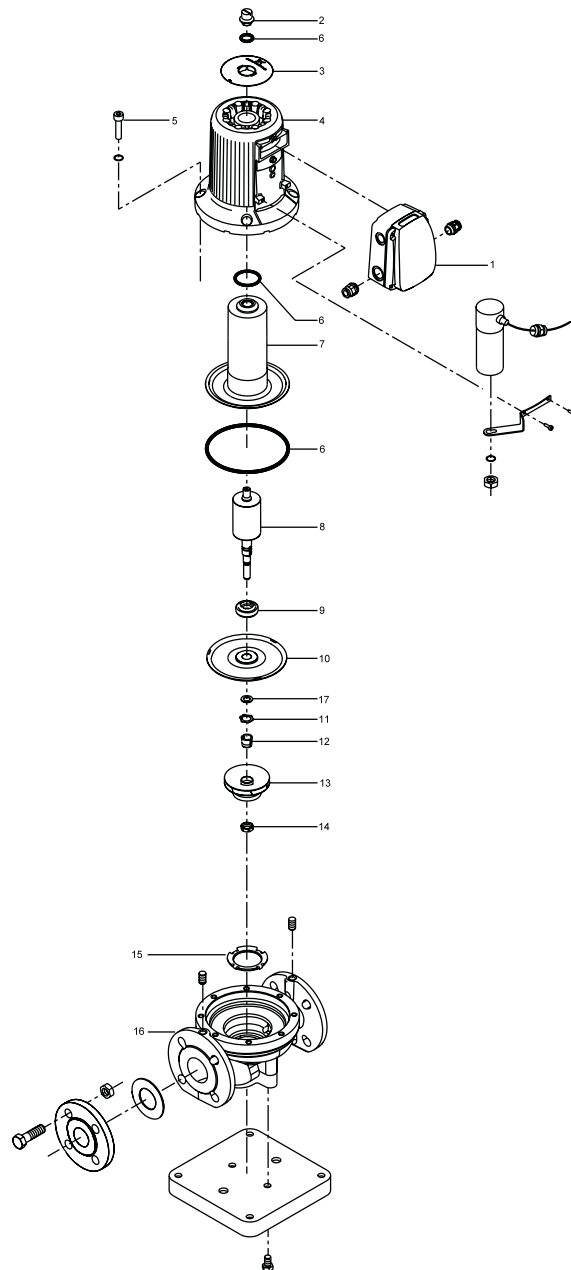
Exploded view of a VersaFlo UP(S) Series 200 pump
